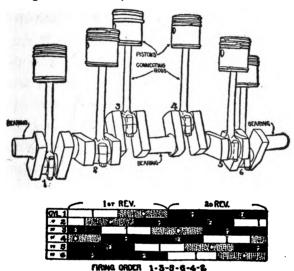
Crank Shaft of Six-cylinder Engine.
